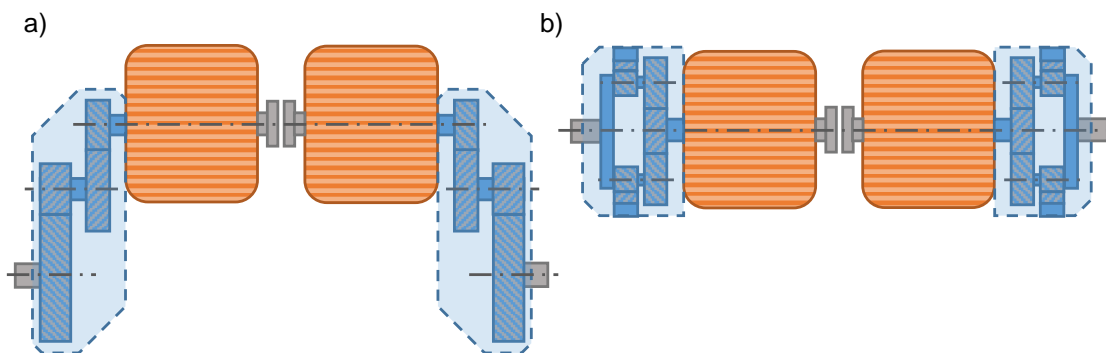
Exemplary gearbox concepts for e-drives with two electric machines; a) offset helical gearboxes; b) planetary gears
